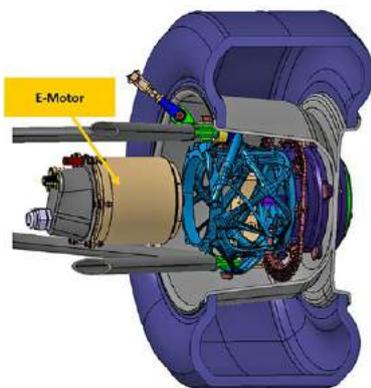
The 2018 wheel hub drive package has been designed to fit into the lowest amount of space (Courtesy TUfast Racing Team)
